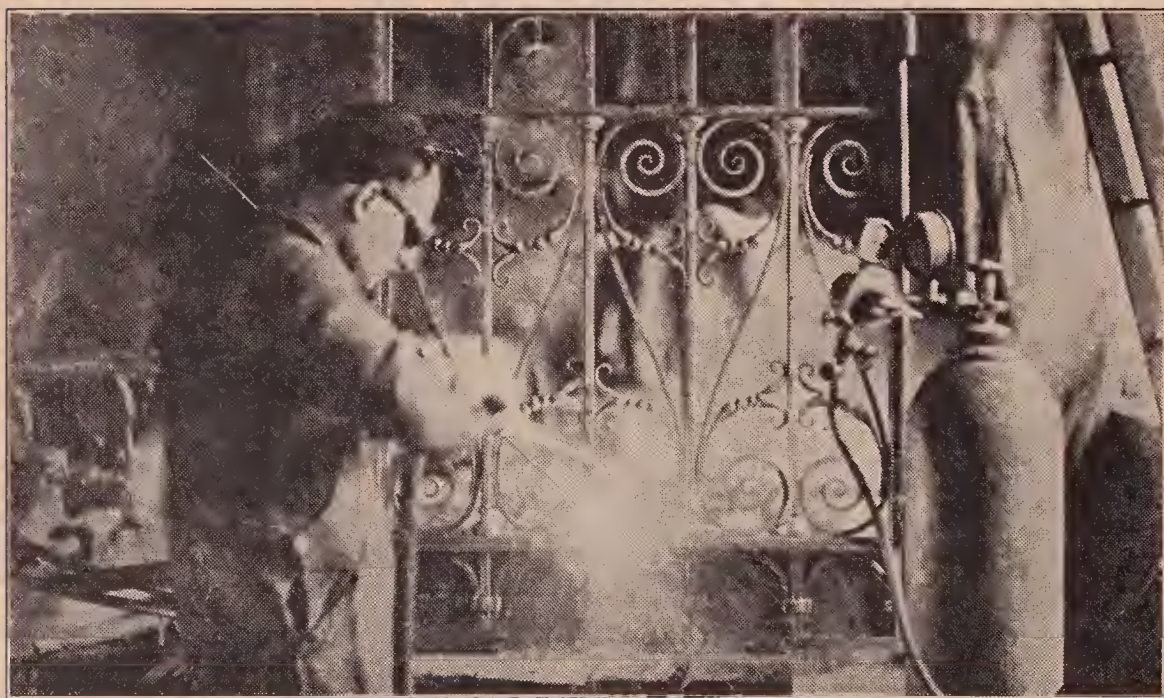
Welding an iron grill with an oxy-acetylene flame.
